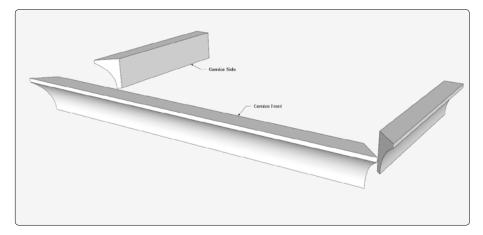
An exploded view of the cornice molding. It is not always necessay to draw an element like this as separate components.
